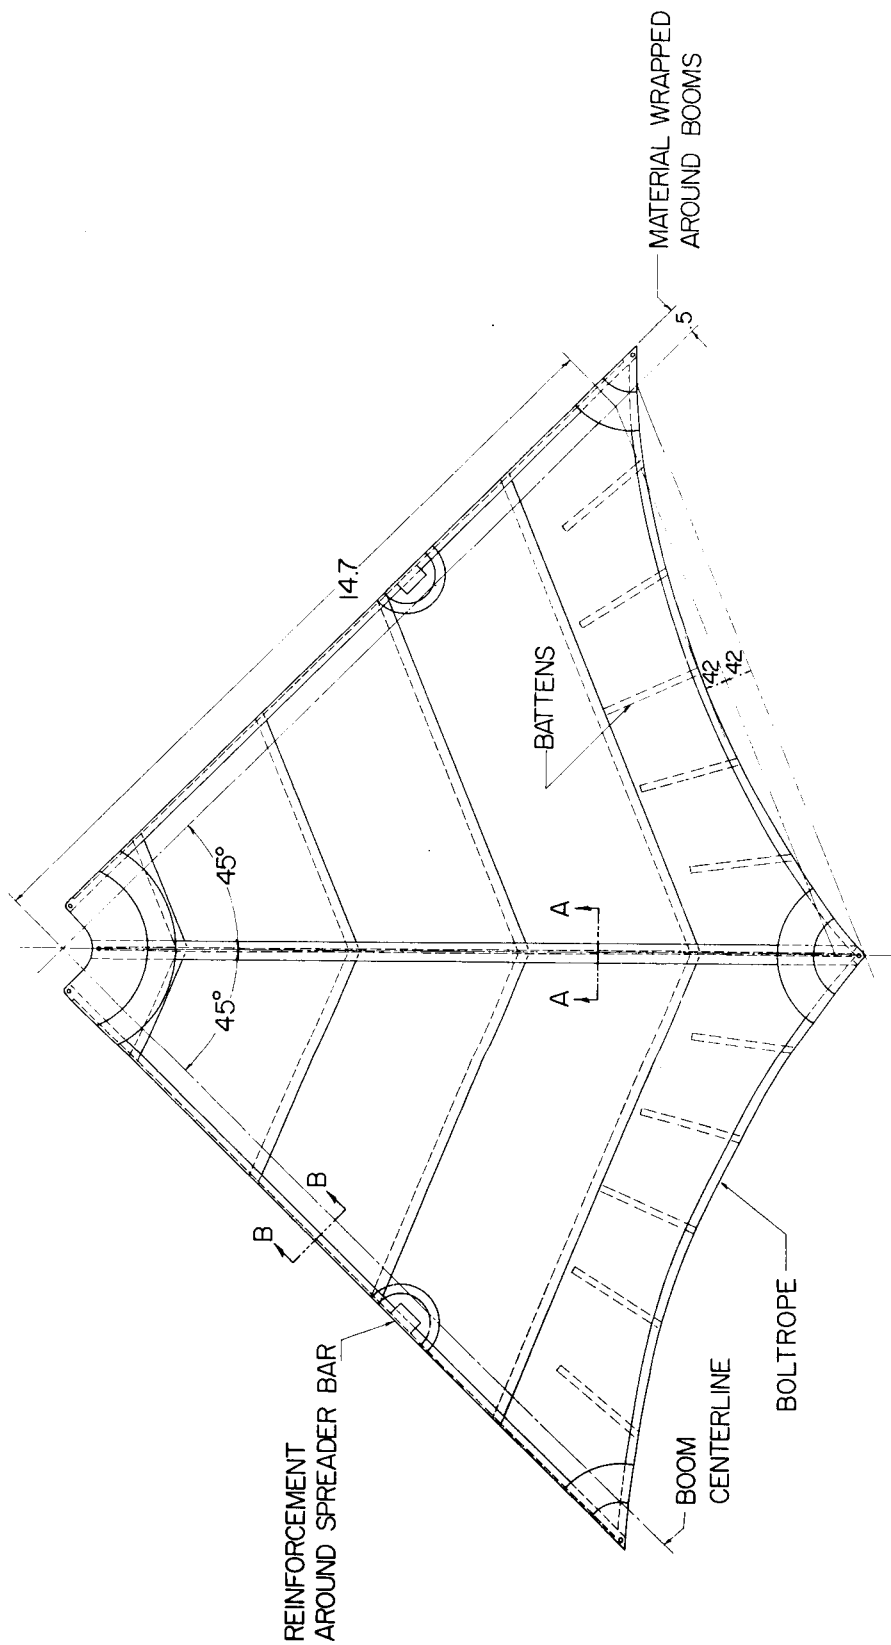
Drawing of wing flat pattern showing details of membrane used on vehicle B.
